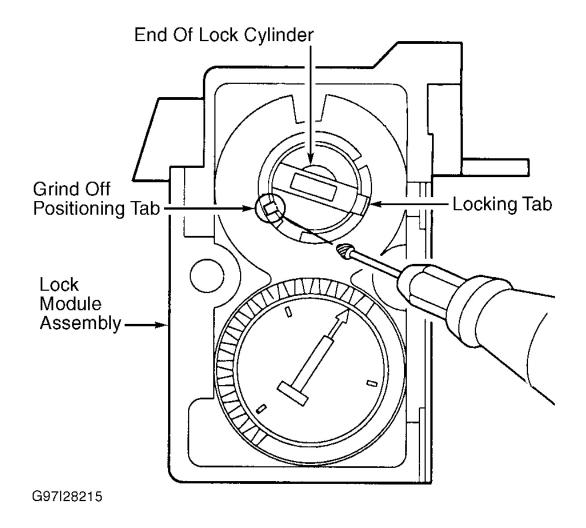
Removing Lock Cylinder Positioning Tab Courtesy of GENERAL MOTORS
